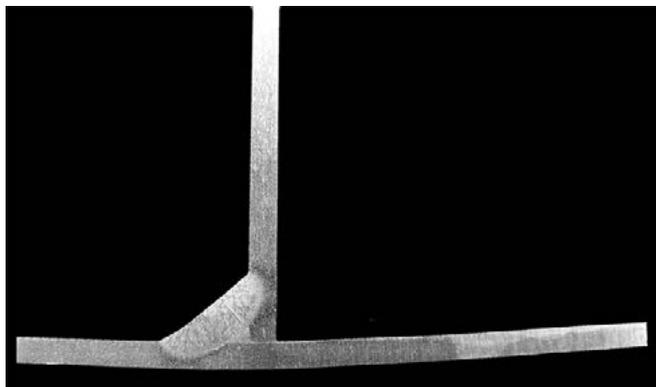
Macrostructure of the T-joint made of sheets using the LORCH V 40 AC/DC welding machine and the parameters presented in Table 4
